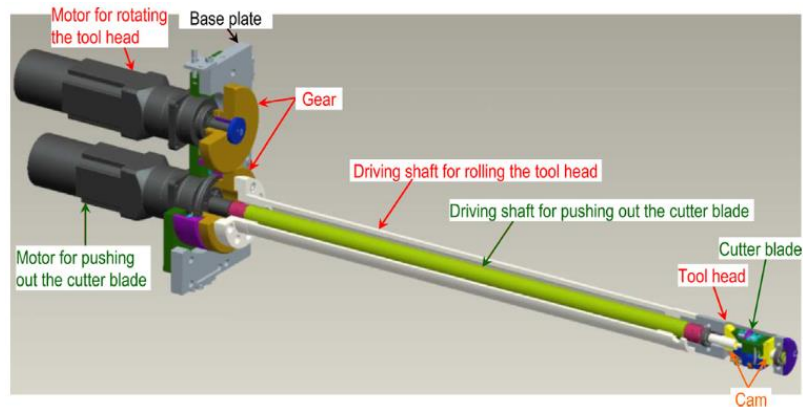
Overall view of the cutting tool head with the power transmission system [109]
